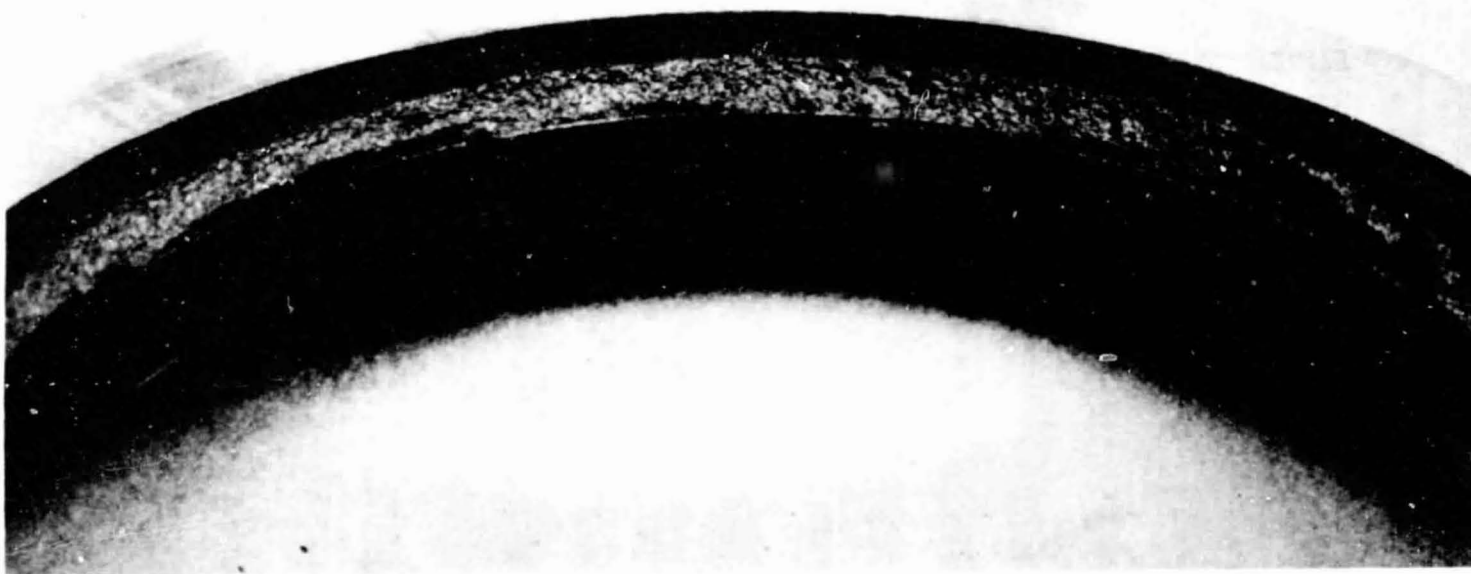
Pump End Primary Seal Ring Position 3, P/N 99RS010302,
